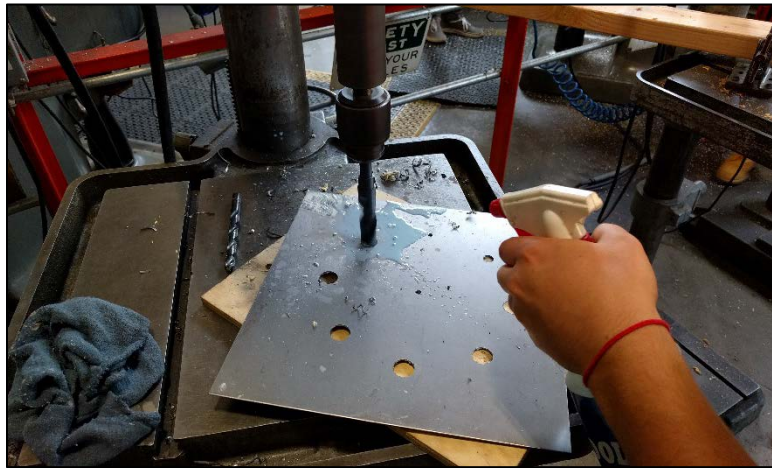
Brian drilling holes into a steel plate to form the orifice plate.
